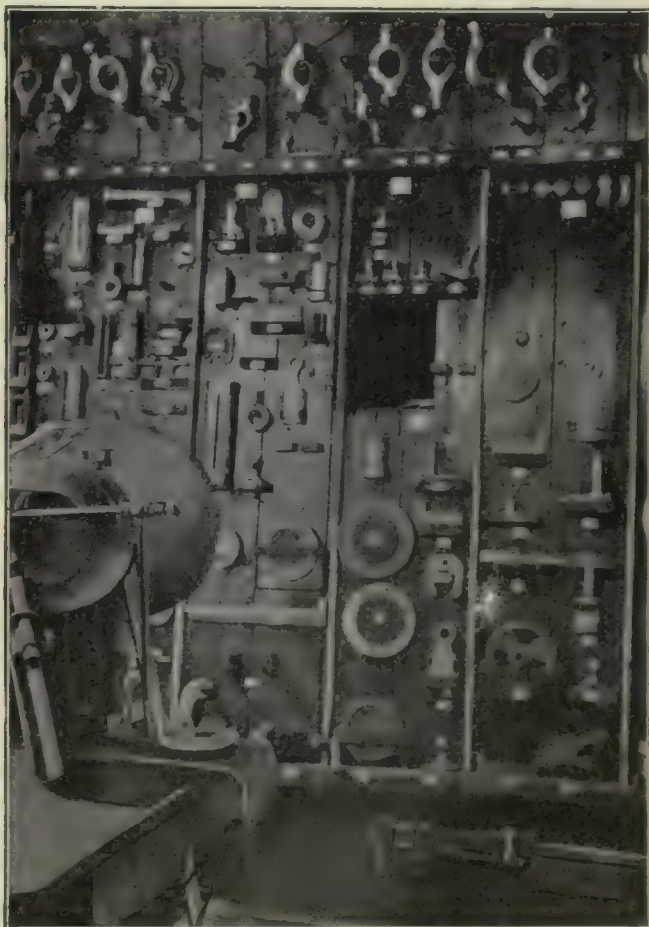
STORAGE FOR LATHE TOOLS AND GAGES
